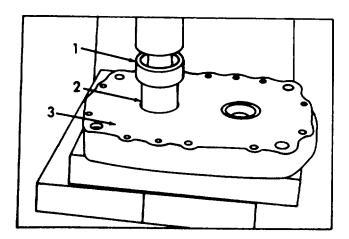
Bearing and Oil Seal Removal Using Tool J6270-3.
